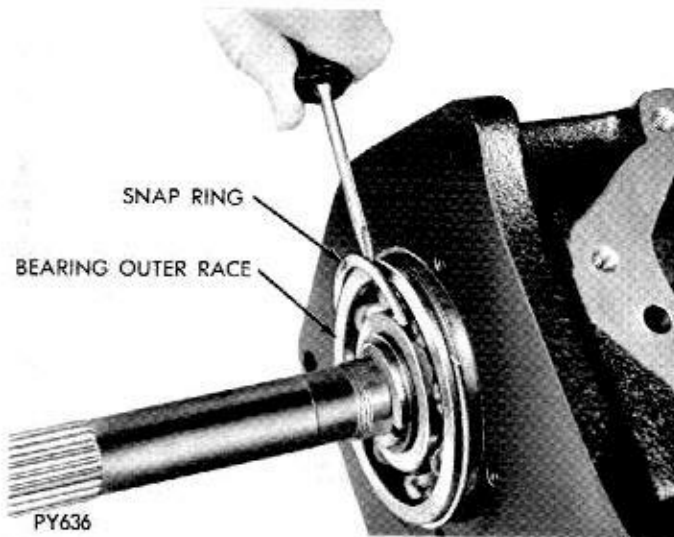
Snap Ring on Pinion Gear Bearing—Removal
